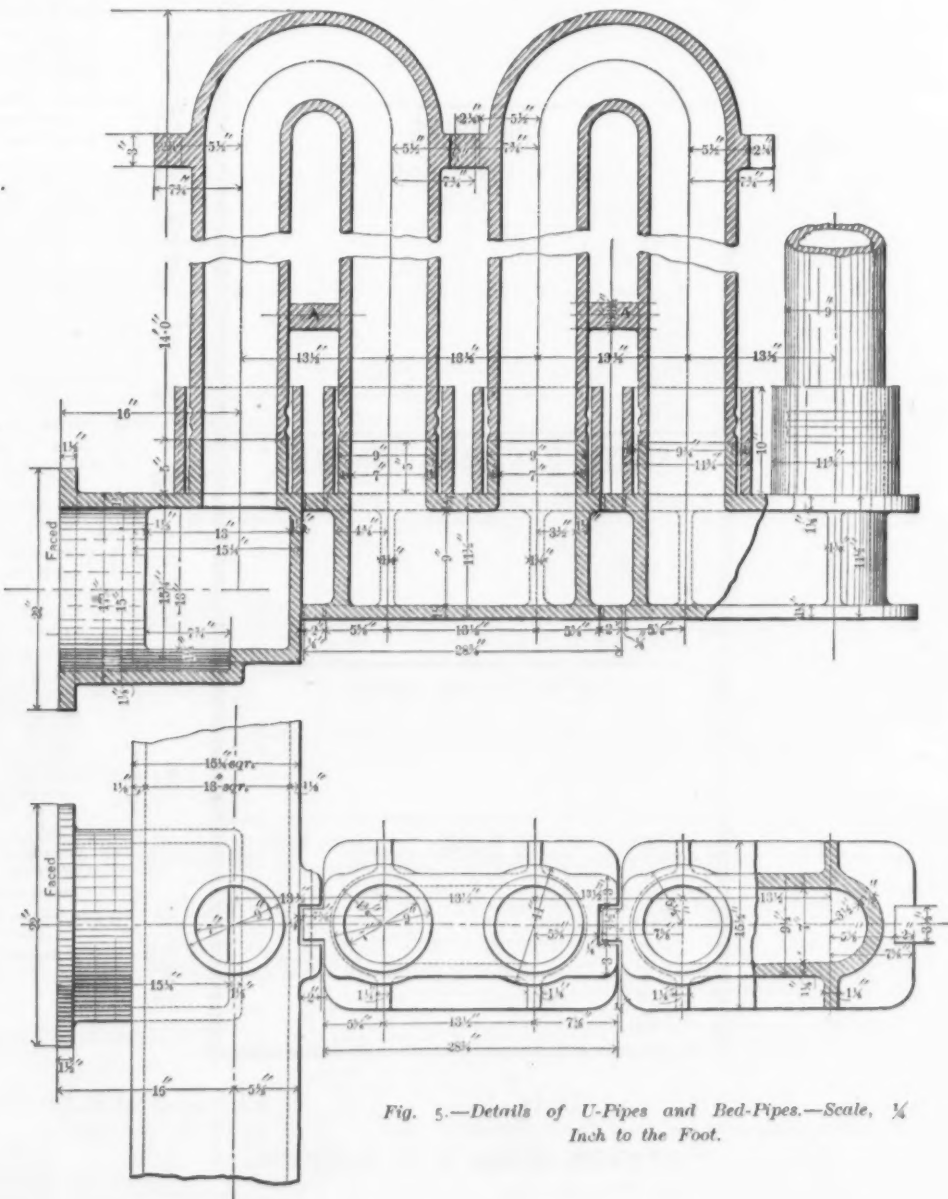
Details of U-Pipes and Bed-Pipes.—Scale, 1/4 Inch to the Foot.
